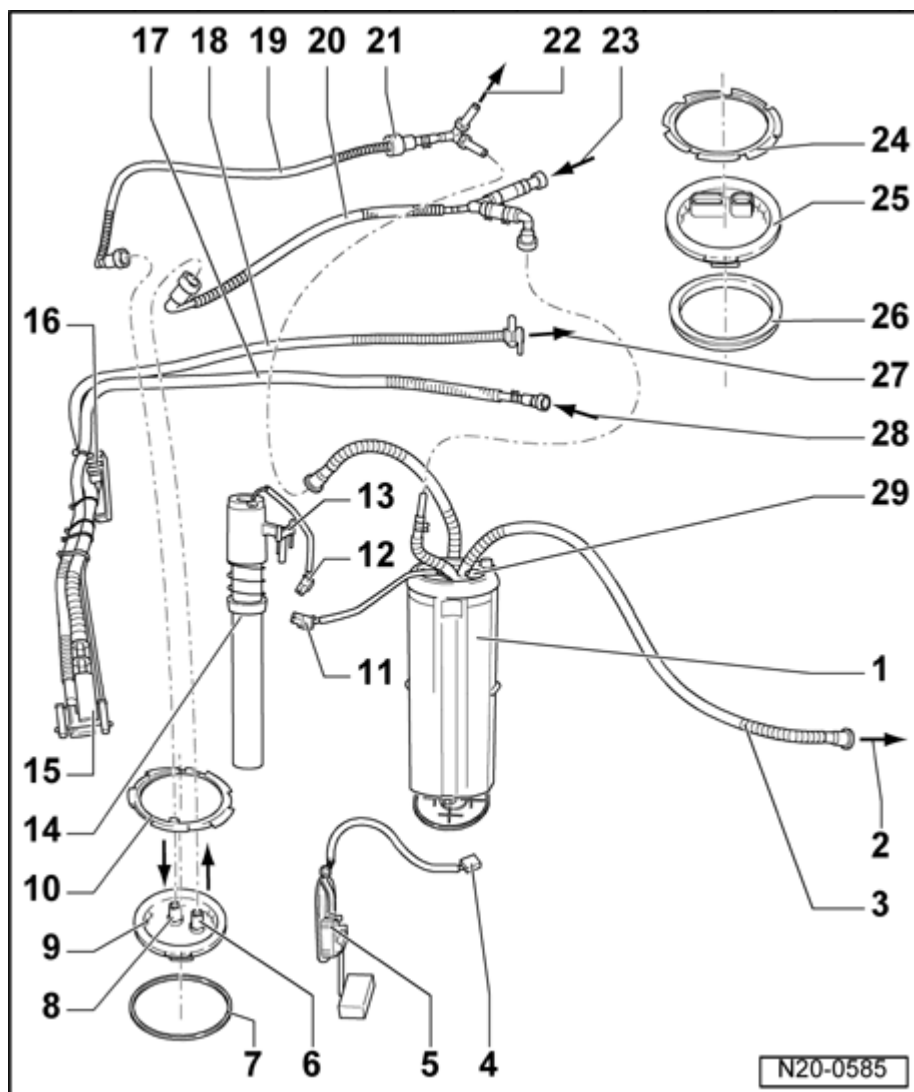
Fuel Delivery Unit, Fuel Level Sensor And Suction Jet Pump, Right Side, Assembly Overview
